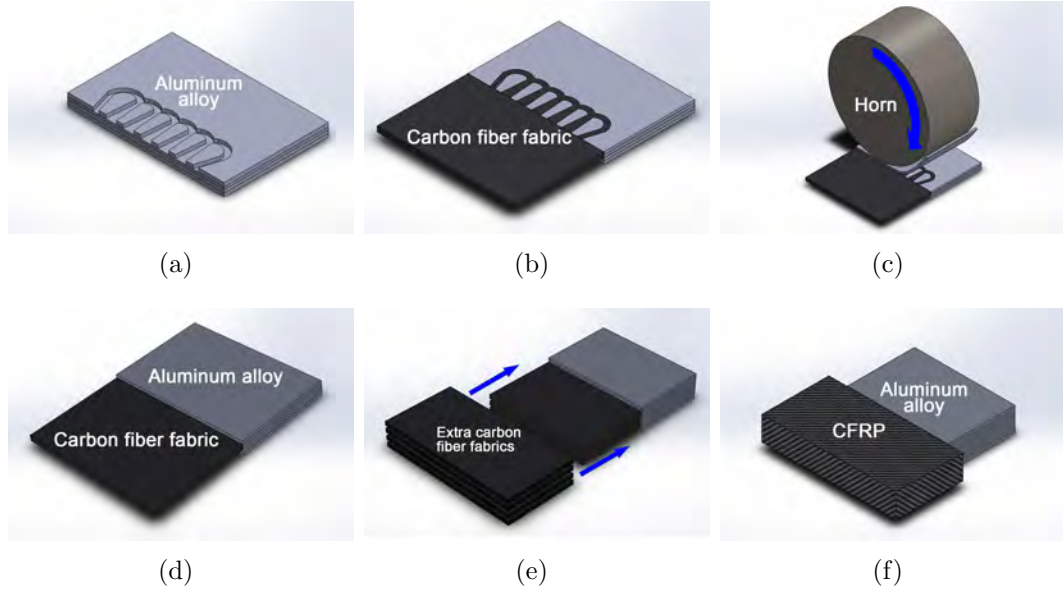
CFRP-AA joint manufacturing process schematics: (a) AA matrix is built with UAM and channels are machined; (b) dry CF tow loops are placed in the channels; (c) one layer of AA foil is welded by the UAM horn; (d) one layer of CF tow loops is embedded; (e) three layers of CF tows are embedded by repeating steps (a) to (d), extra CF fabrics are inserted to match the thickness of CFRP to AA; (f) CFRP is cured with epoxy to complete the CFRP-AA joint.
